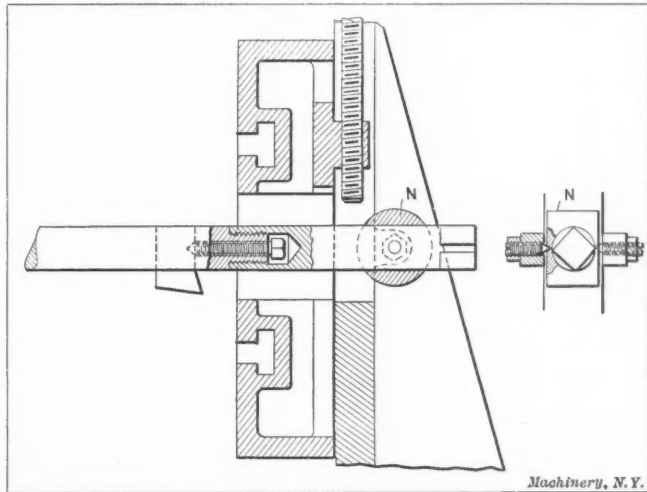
Detail of Keyseating Attachment shown in Fig. 2
